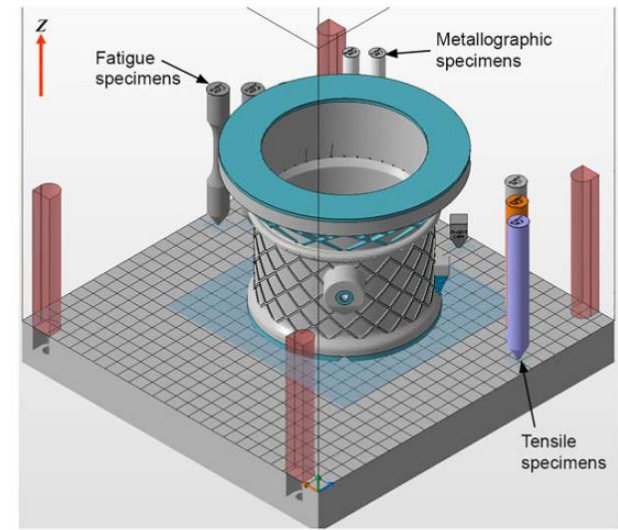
Build layout of a part, support structures, and serialized witness specimens.
